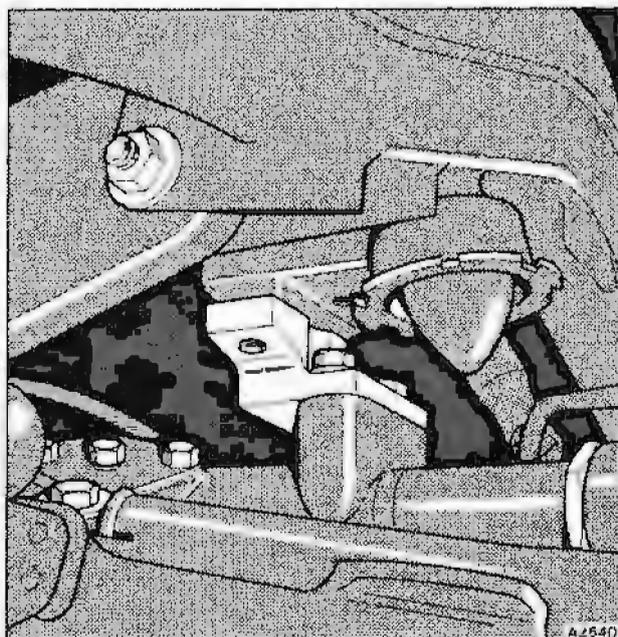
Modified arrangement – adapter blocks to sub-frame
